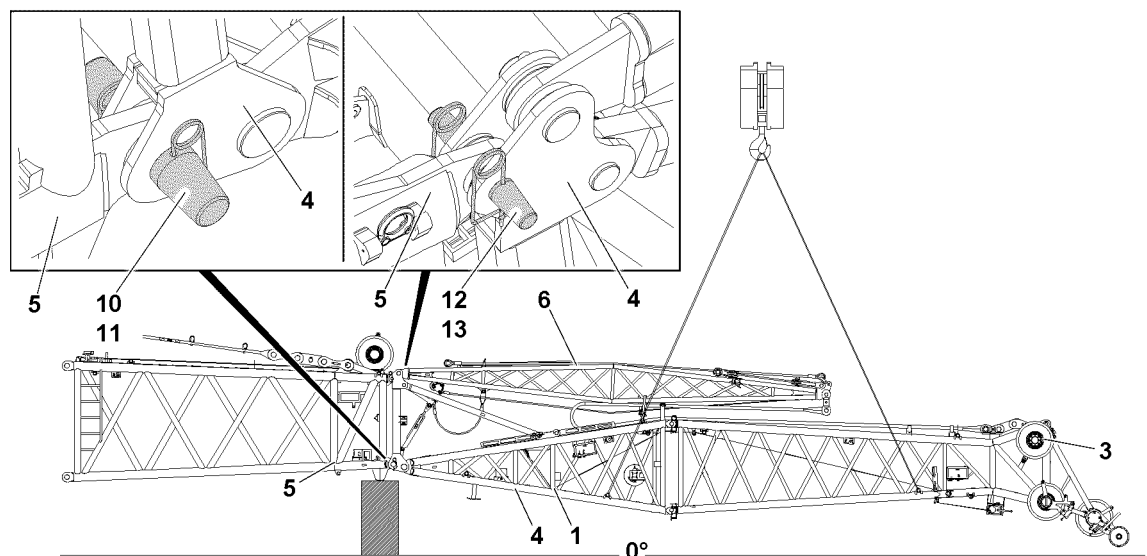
Unpinning the F-assembly unit with the F-end section on the L-end section or on the F-connector head
